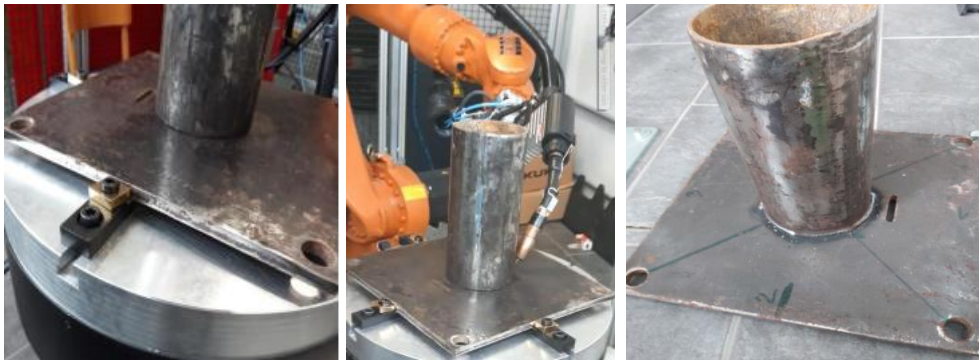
Analysis of the welding process (a. Placement of the workpiece, b. peeing, c. finished product)
